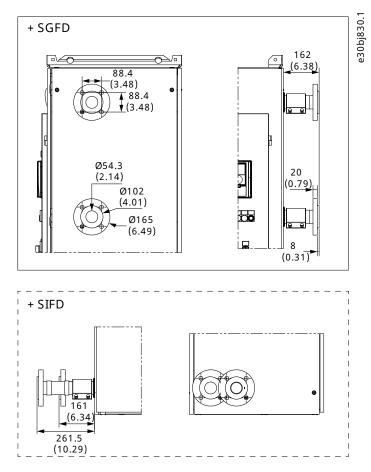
Dimensions of the Optional DIN Flanges, +SGFD and +SIFD, in mm (in)
